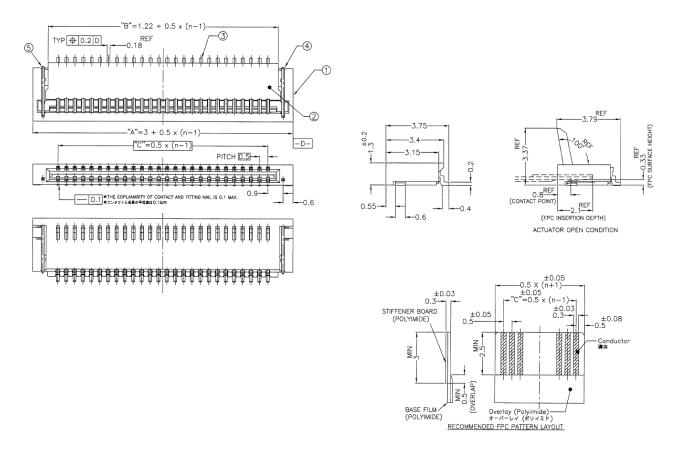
12-Pin ZIF Connector (SE965HP to Flex), Motorola P/N 50-12100-2292 (FCI P/N 10051922-121LF)
